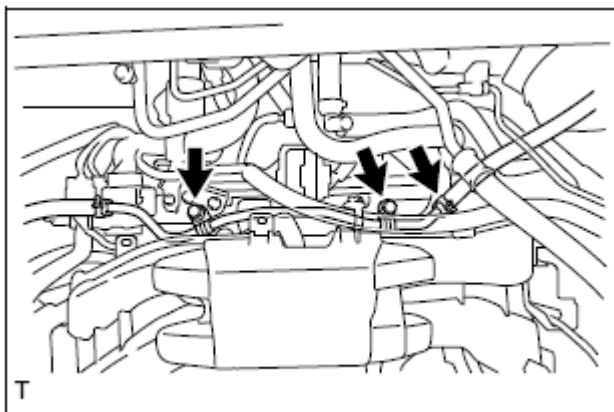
Identifying Vacuum Tube Connector Hose Clamp And Bolts
